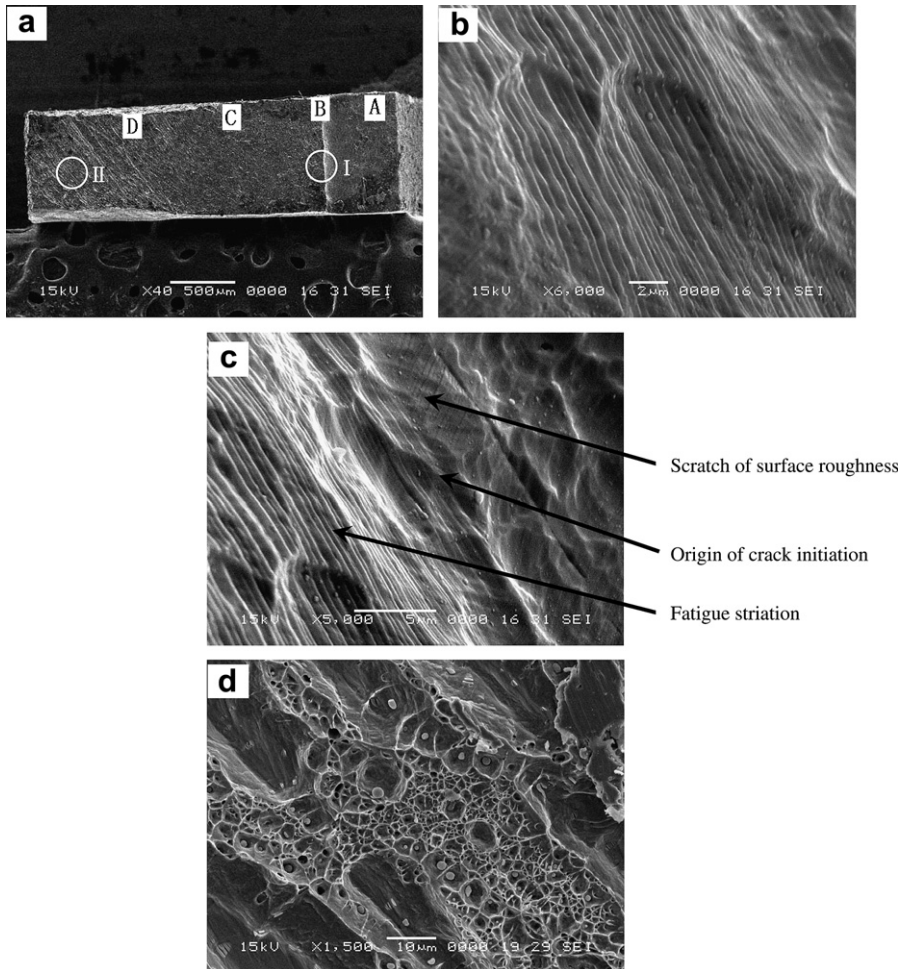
SEM micrographs of fatigue fracture surface. (a) The whole appearance of fracture surface. (b) Magnification of I, fatigue striations. (c) The intersection of the origin of crack and notch, where the fatigue crack initiates. (d) Magnification of II, dimples in the overload fracture region.
